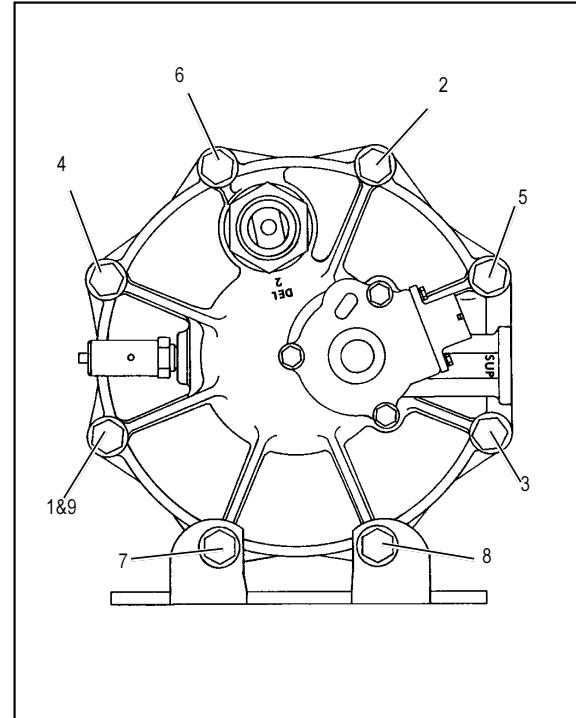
END COVER TO HOUSING TORQUE PATTERN
